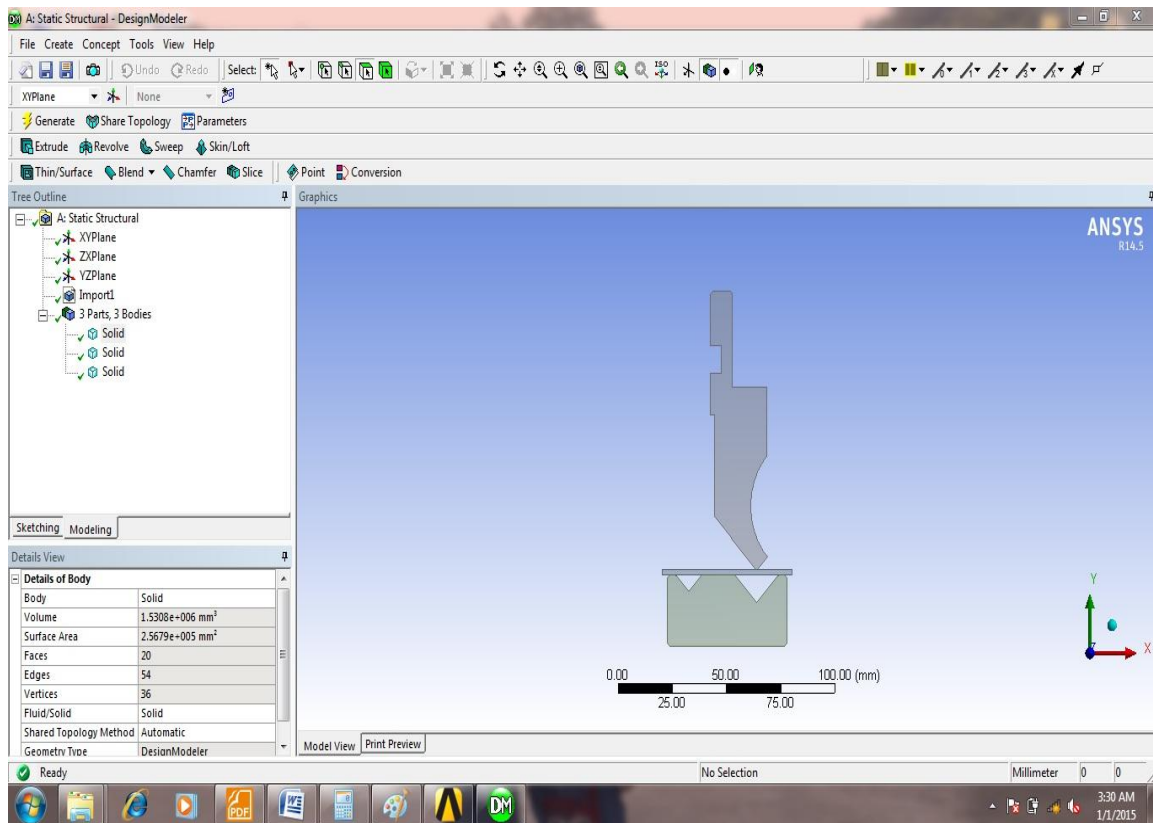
Geometry of Die, Punch and Metal Sheet using static analysis
